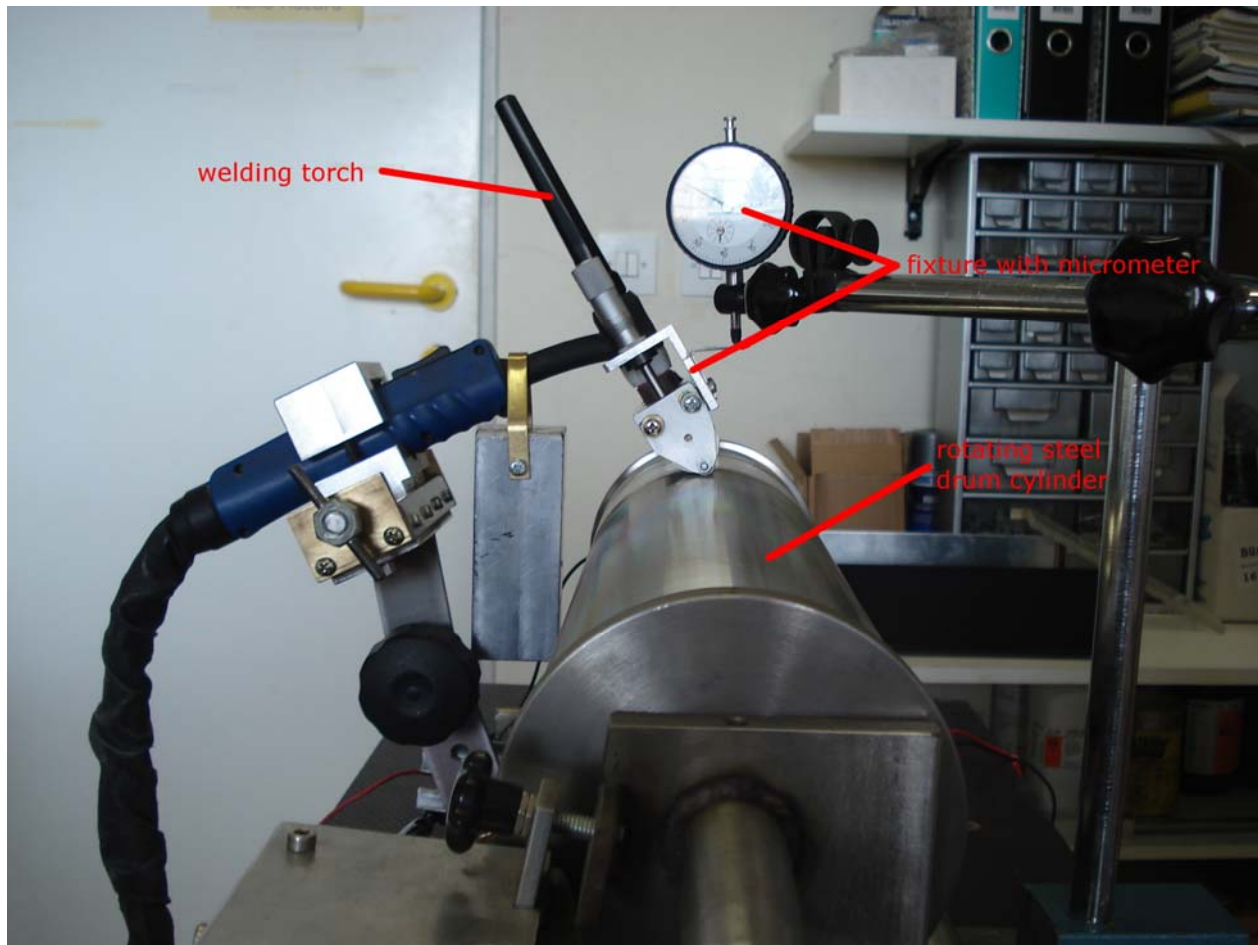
Device to measure the radiation emitted from a TIG welding process, containing an automatically rotating steel drum, a welding torch and fixture, together with a micrometer, a gas flow rotameter (not shown) and an inverter (not shown)
